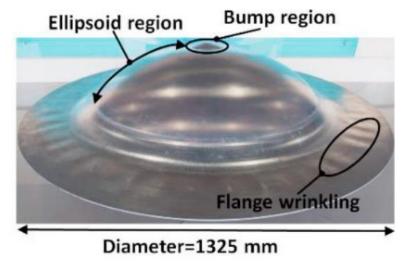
Photograph of the formed workpiece with an initial diameter of 1378mm^[9]
